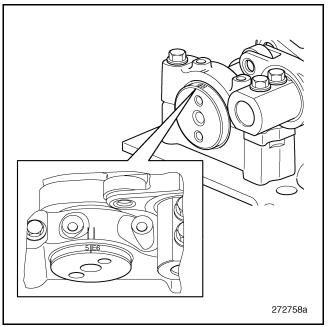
Camshaft Timing Marks — Front Bearing Cap
